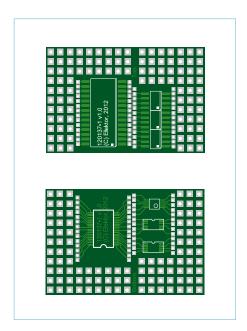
The through-hole plated double-sided PICo PROto PCB at a scale of 150%.
